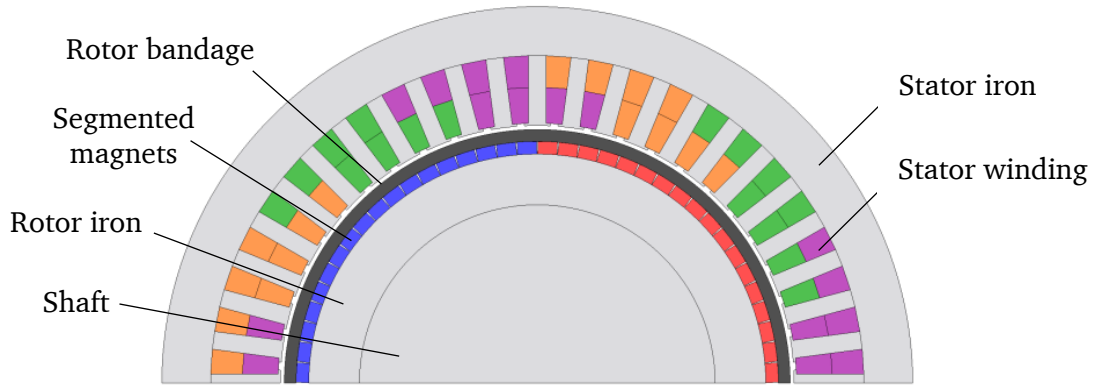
Section view of the E-machine geometry, 1/2 model in JMAG (with surface mounted magnets and bandage)
